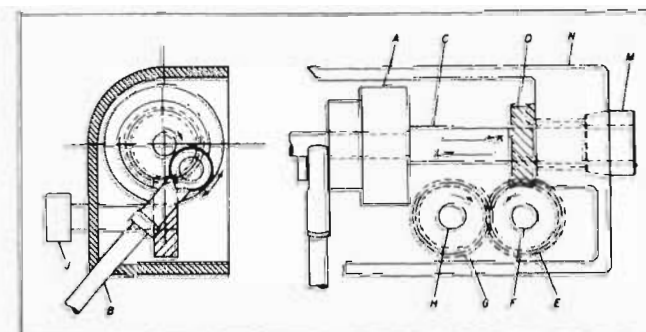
Cone brake prevents reversal of this intermittent drive during the dwell period.
